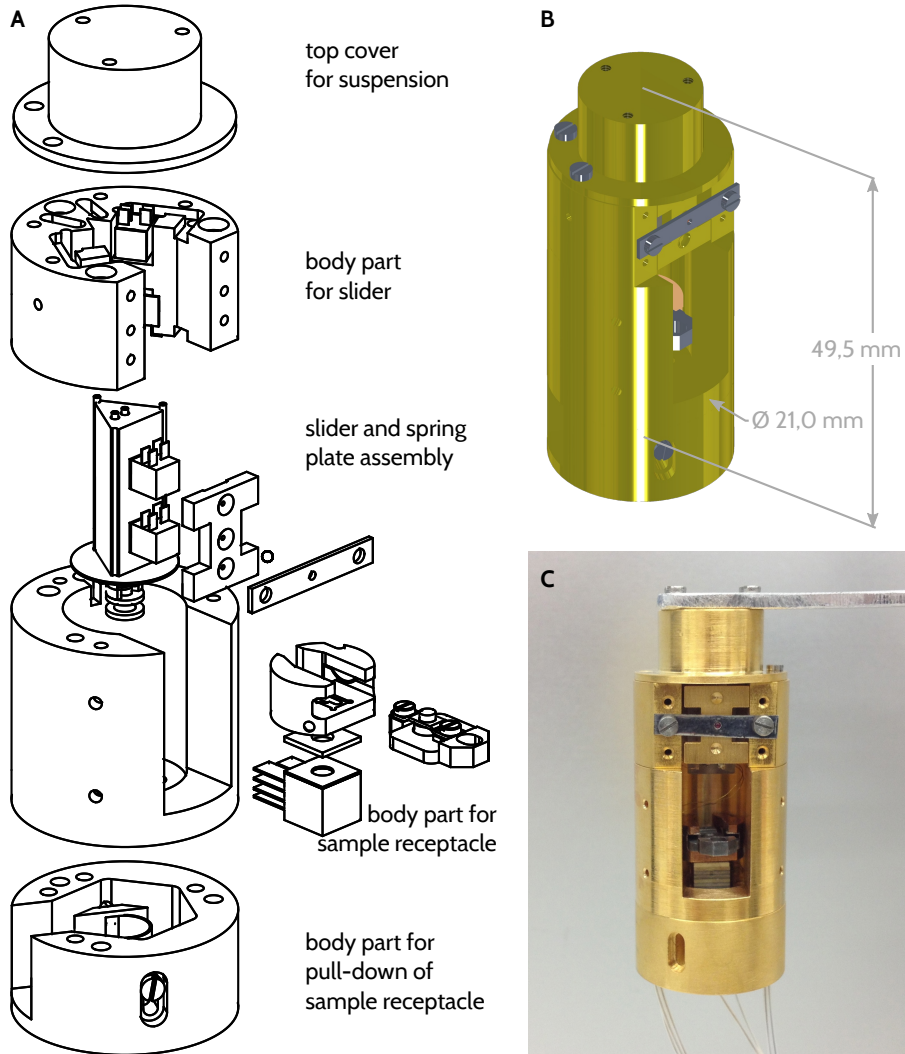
Design of the STM head. A Exploded view depicting the main parts. The inner two body parts are intended for the vertical piezo motor with the tip and the lateral piezo motor with the sample. (For clarity, only four piezos of the vertical motor are drawn.) The further body parts are a top cover to mount the STM in the bore of the magnet, and a bottom part to adjust the contact pressure of the sample holder receptacle (see text). B indicates the overall dimensions of the STM head. C shows a photograph of the assembled and wired STM head.
